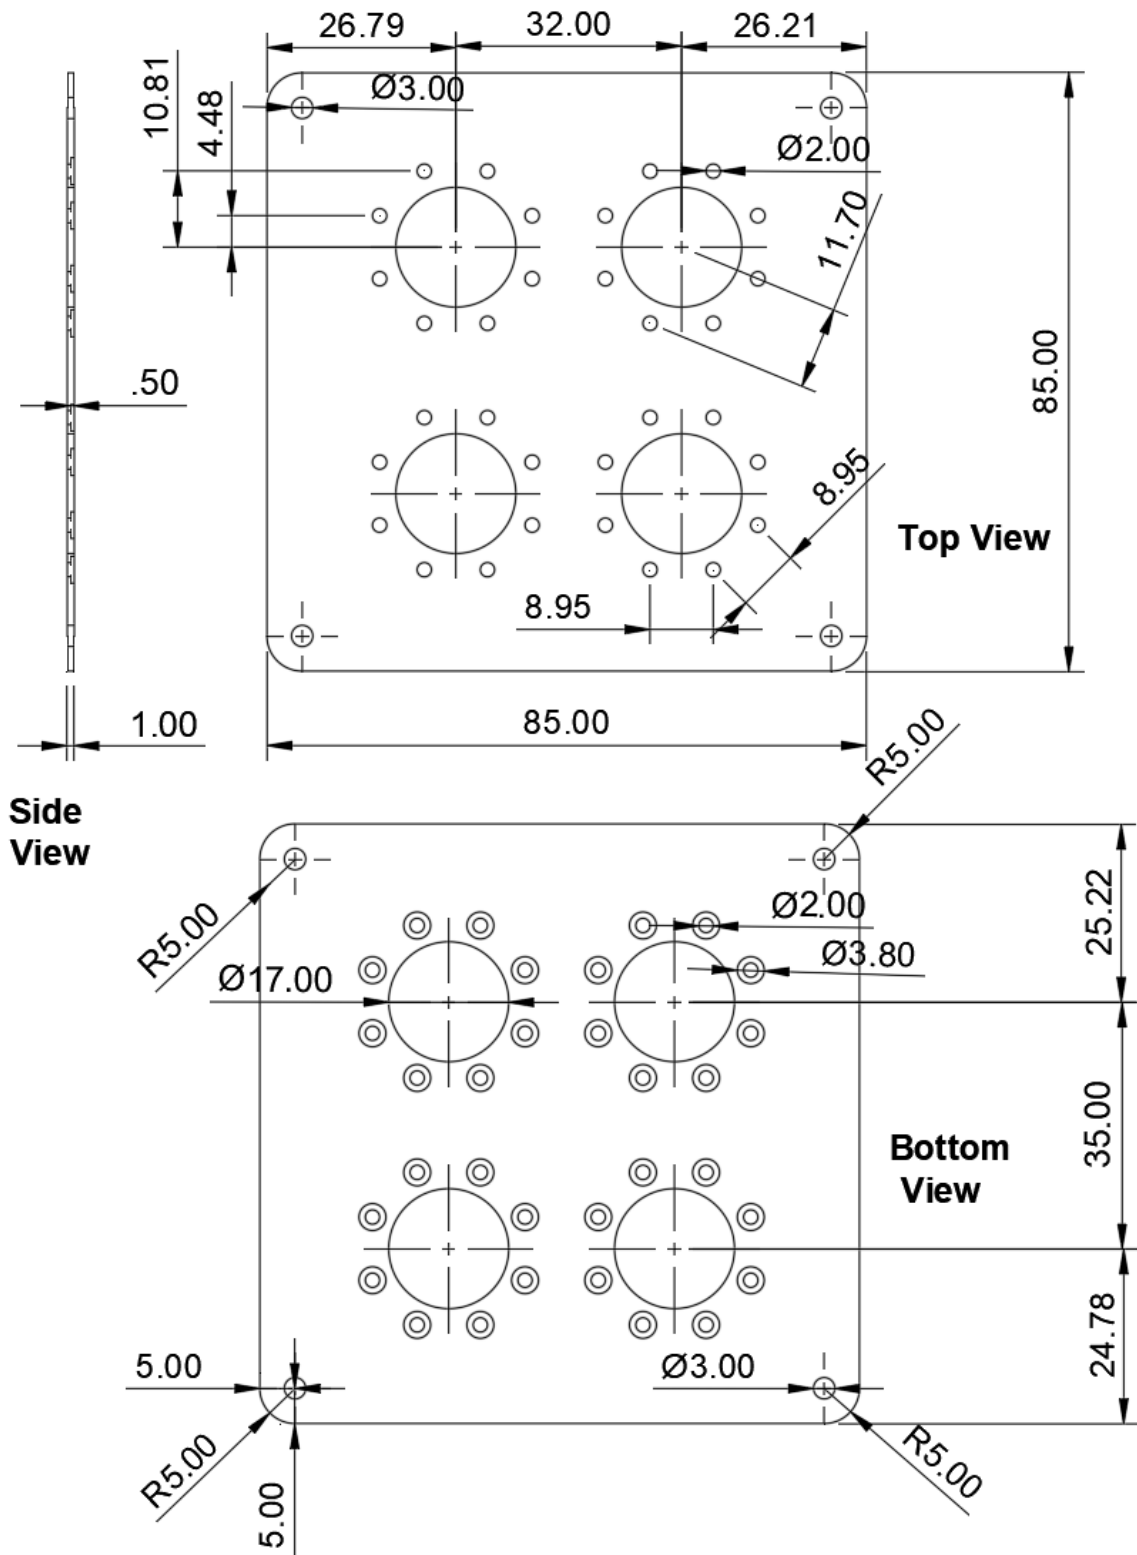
FDSPP Bottom Mount Engineering Drawing
